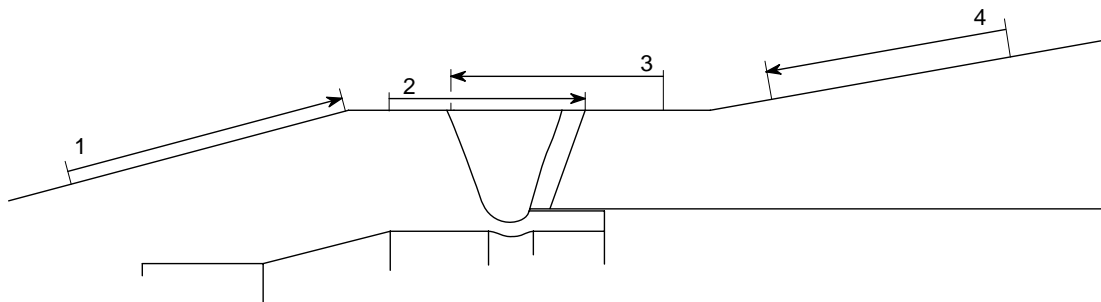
Scanning Surfaces of Dissimilar Weld
